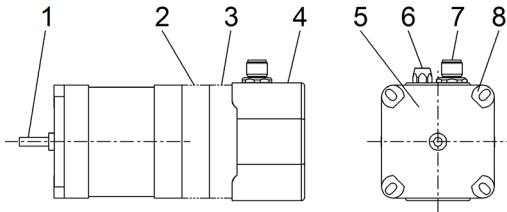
Illustrative drawing of the ROMOTION without optional gear but with integrated electronics and optional rotary sensors
